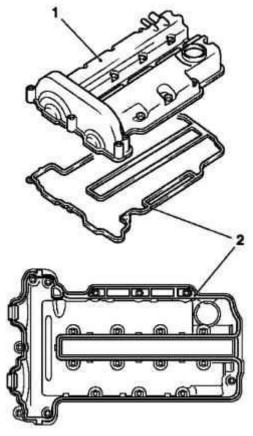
Replacing Cylinder head: 1 - cover 2 - Seal
